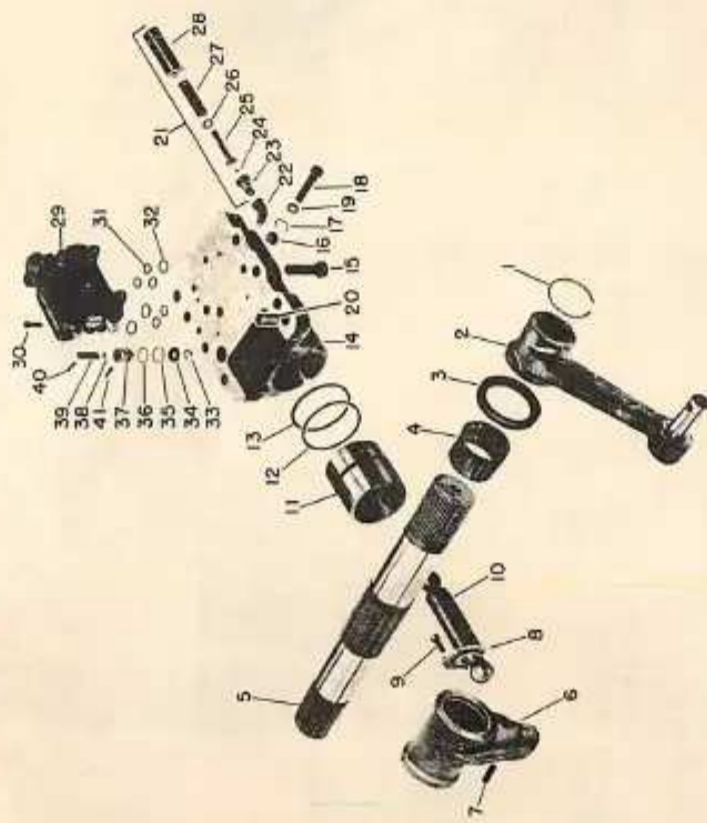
Exploded view of rockshaft and rockshaft lift cylinder with related parts. Exploded view of servo valve (29) is shown in Fig. O157 (early) or Fig. O158 (late production). Dash pot piston (37) is connected to rocker arm (8—Fig. O155) with link (39), and works in bore drilled in lift cylinder housing (14). Cylinder safety valve assembly is (21).
